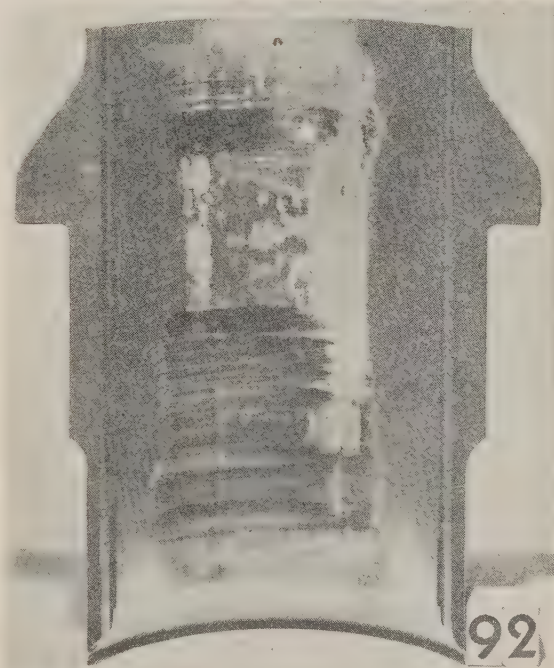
CORROSION AND WIPING OF ALKALI-EARTH-HARDENED LEAD BEARING METAL
